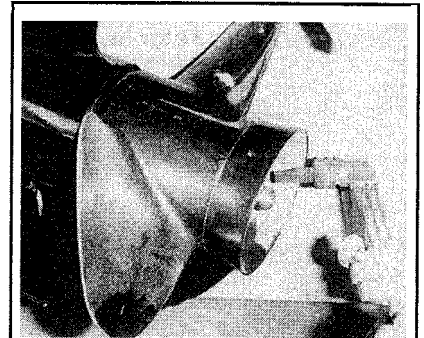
CAREFULLY heat the inside diameter of the propeller with a torch
